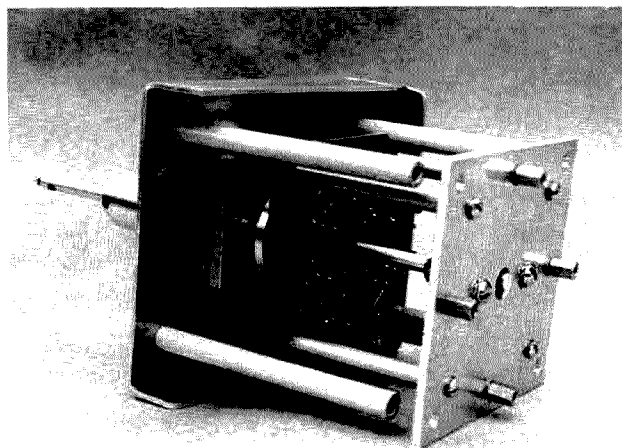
Photo F. An exploded view from the front looking up at the wind-direction indicator.
